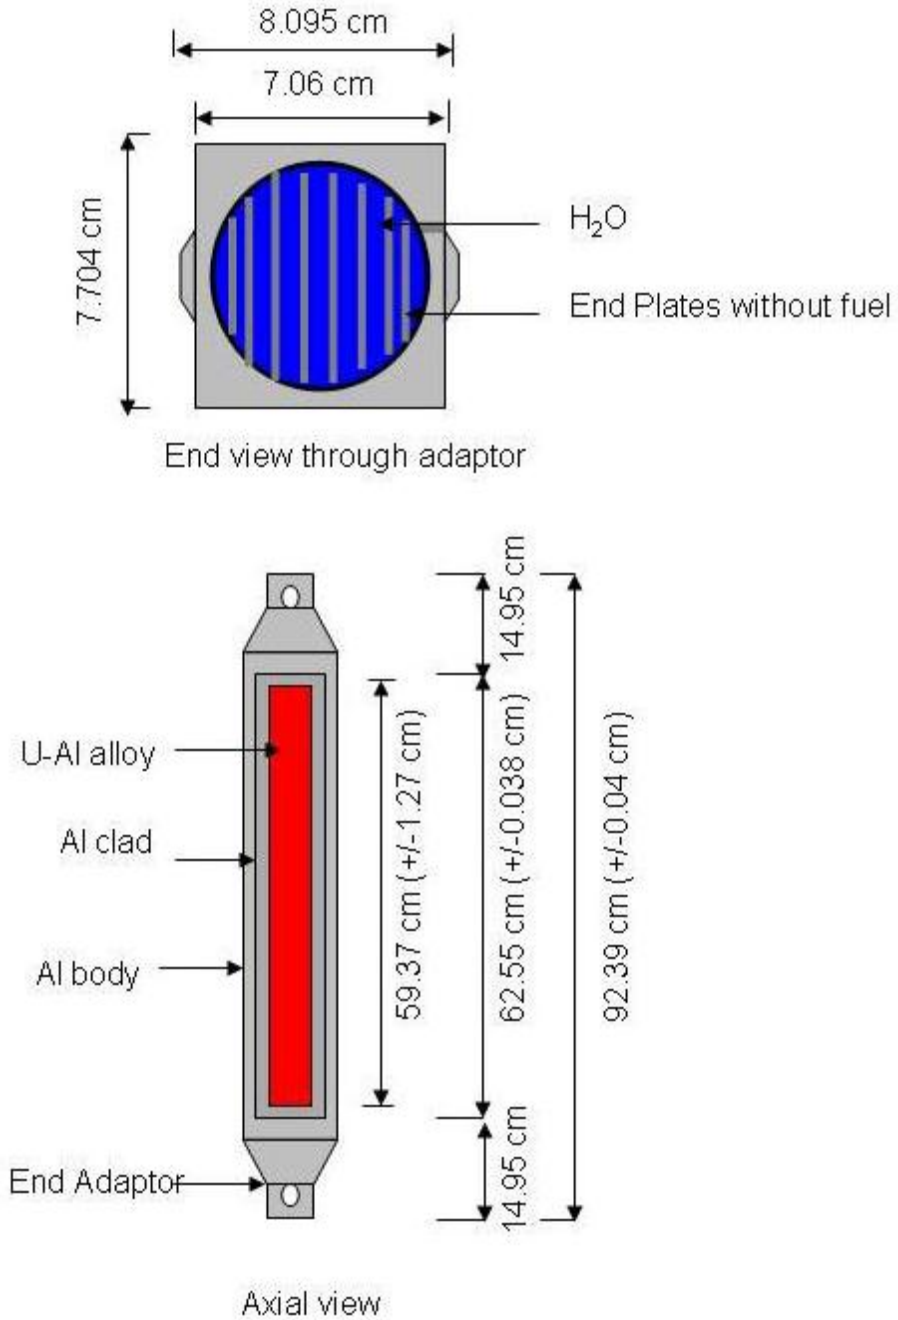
Radial View of Fuel Assembly Adaptor Mechanism (above) and Axial View of Entire Fuel Assembly (below). [1]
